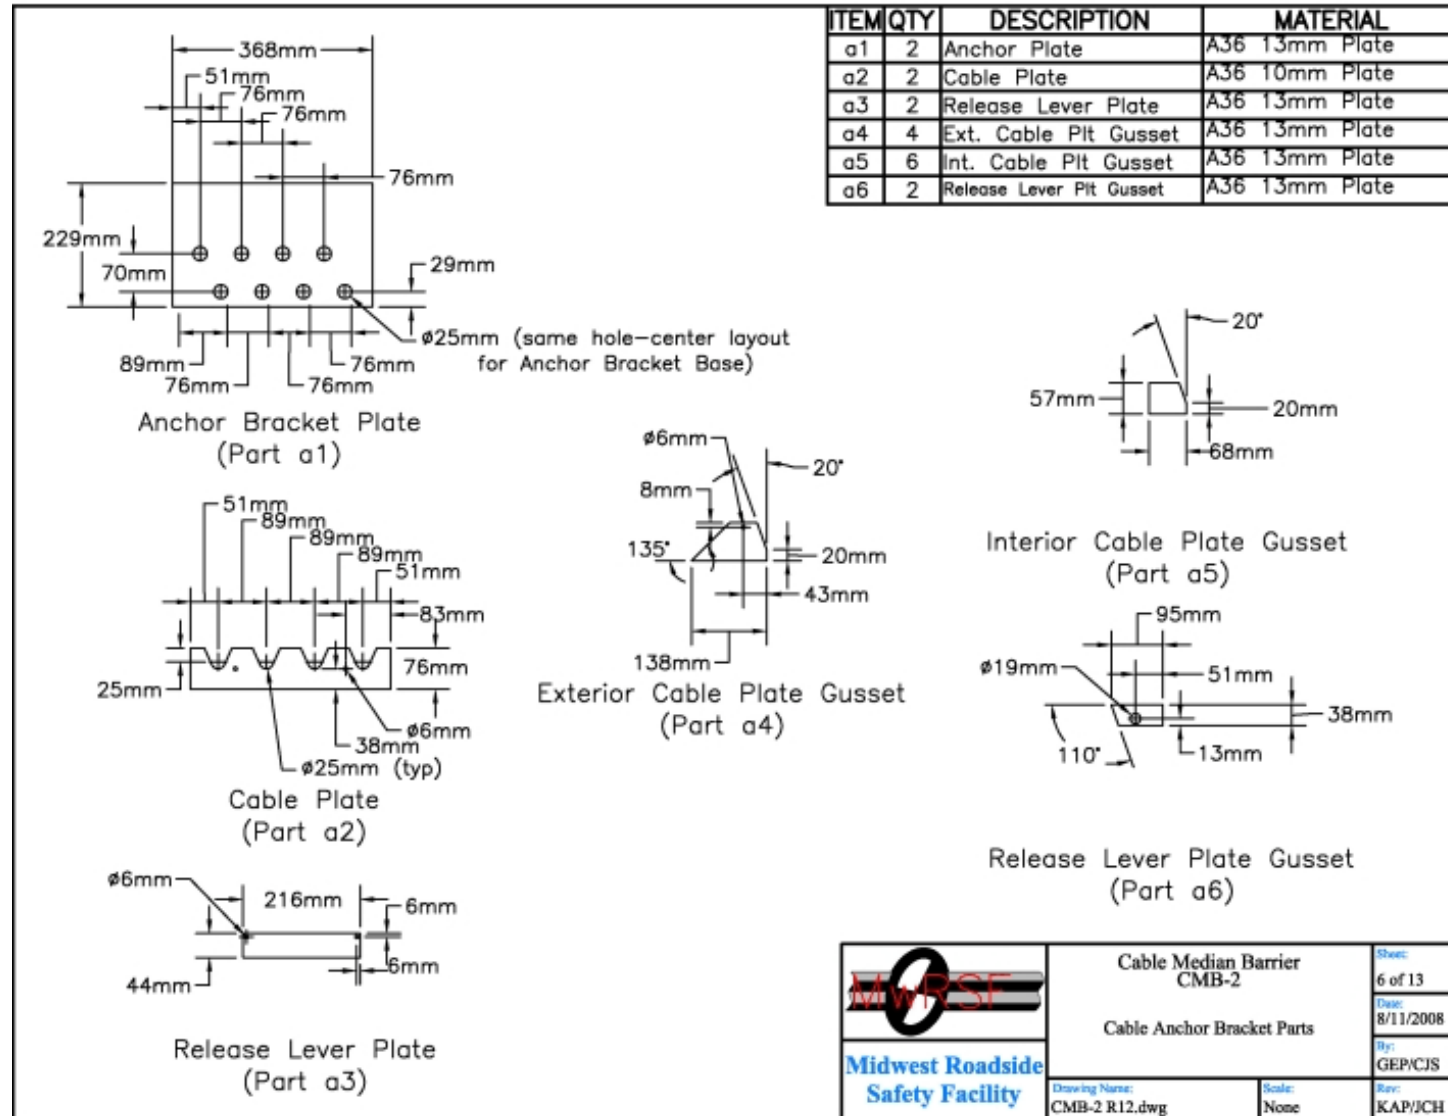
Cable Anchor Bracket Parts (Metric), Design No. 2
